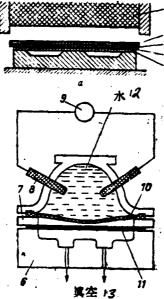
Rubber Hydraulic Forming (a) and Electric Hydraulic Forming (a) of Aluminum Decoration Plate Parts
